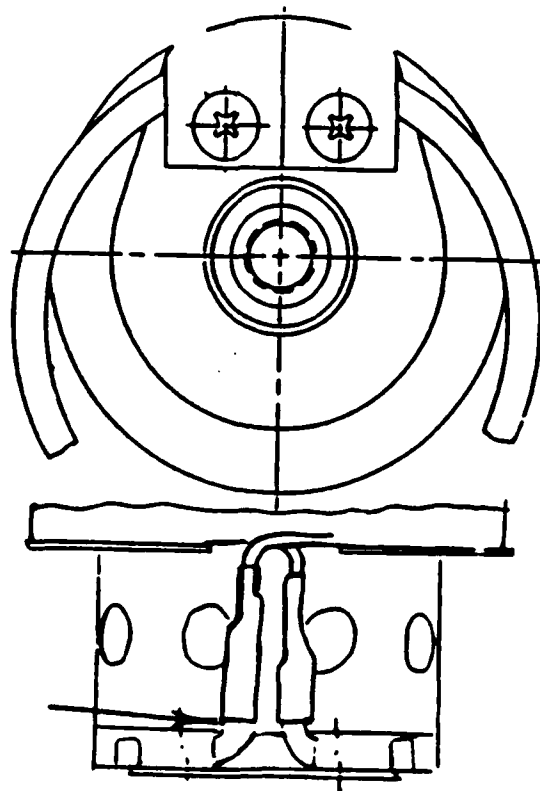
Coil Winding Plate with Cover Plate Installed
